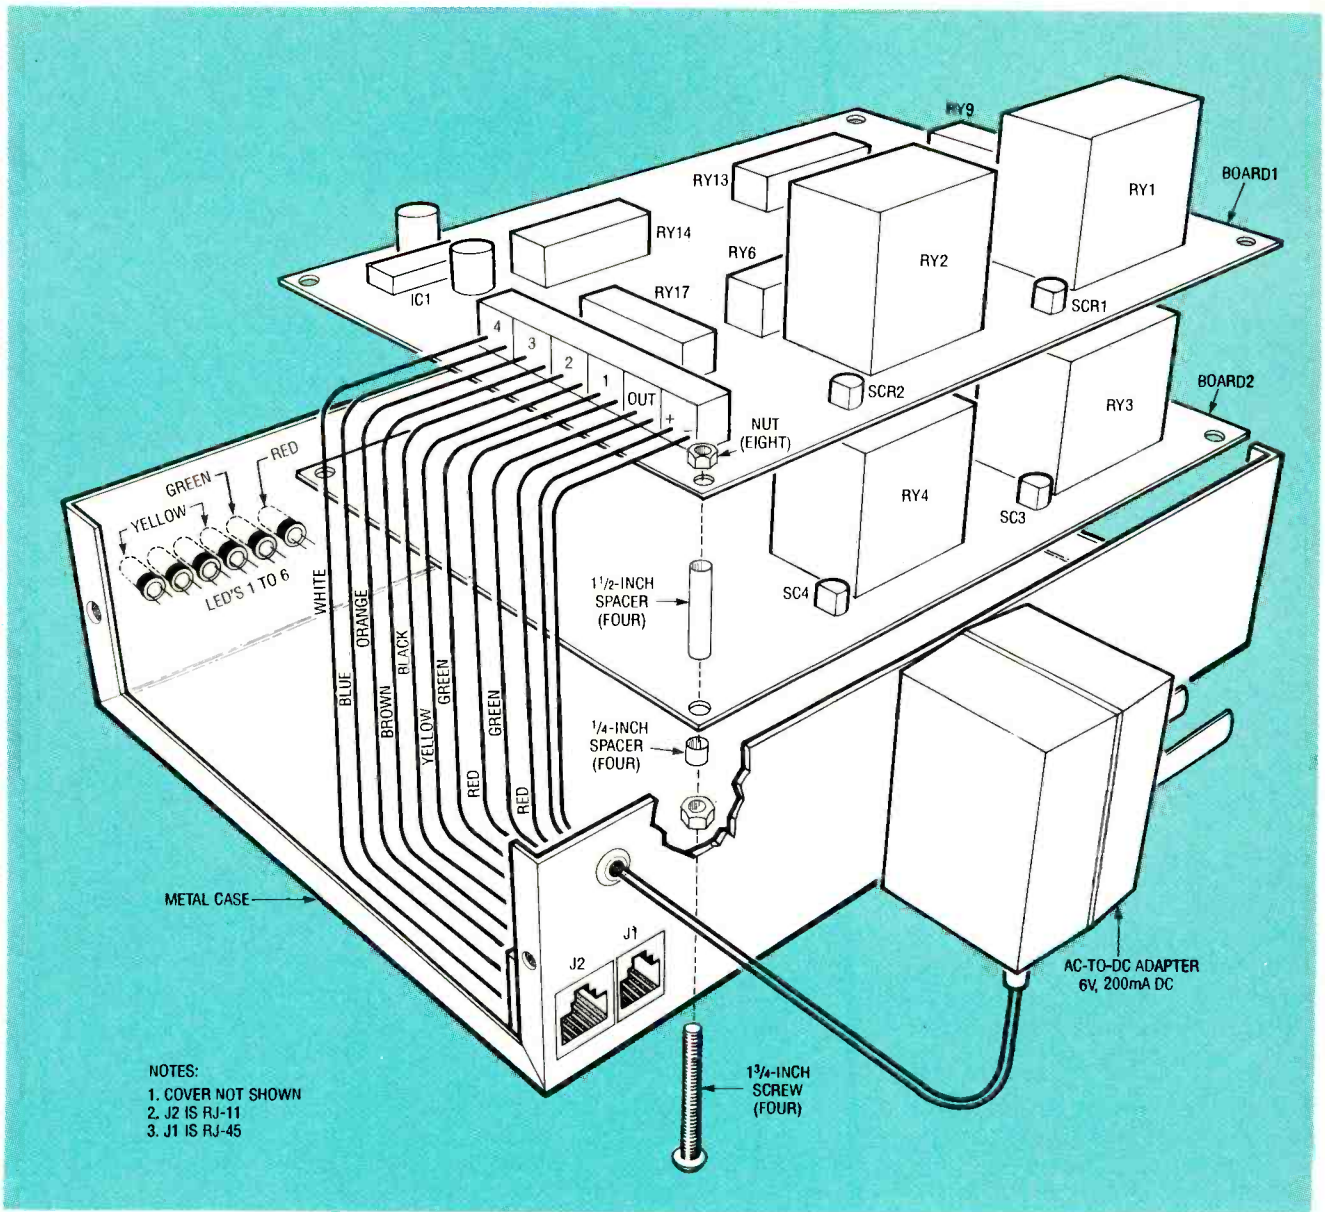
EXPLODED VIEW OF TELEPHONE RING SELECTOR showing arrangement of circuit boards and off-board components. Note the order of color coding at the terminal strip.
